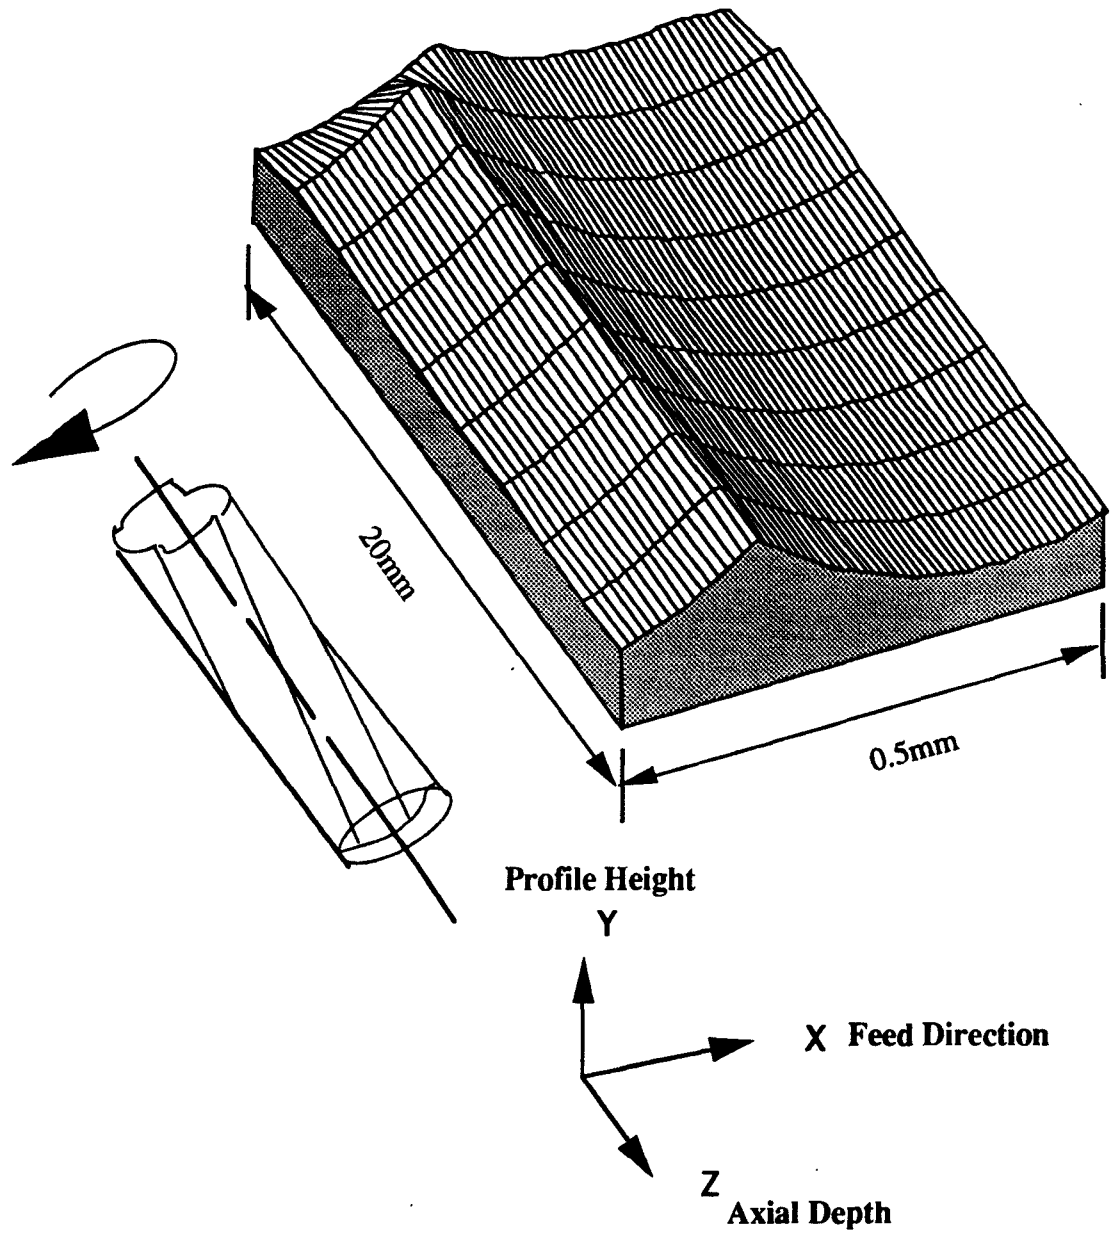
The 3-D geometry of end milling surface for a runout case
